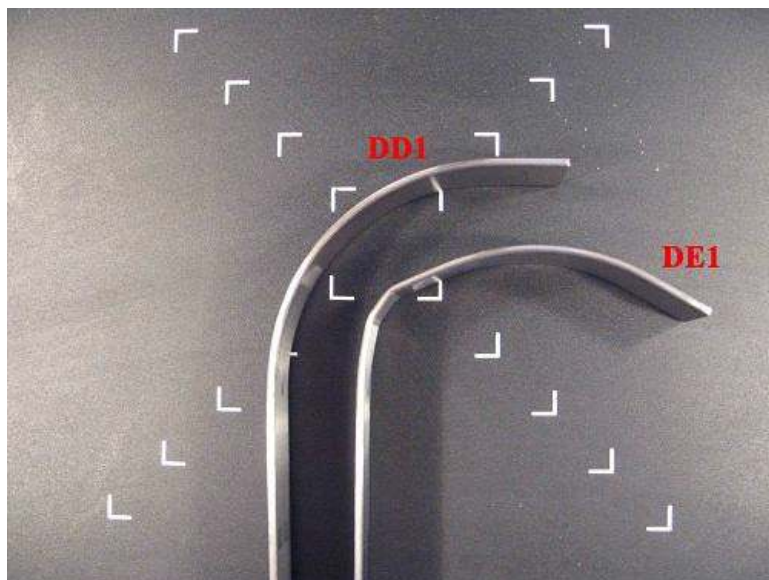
Note non-uniformity of the ER120 welds without post-weld heat treatment.
